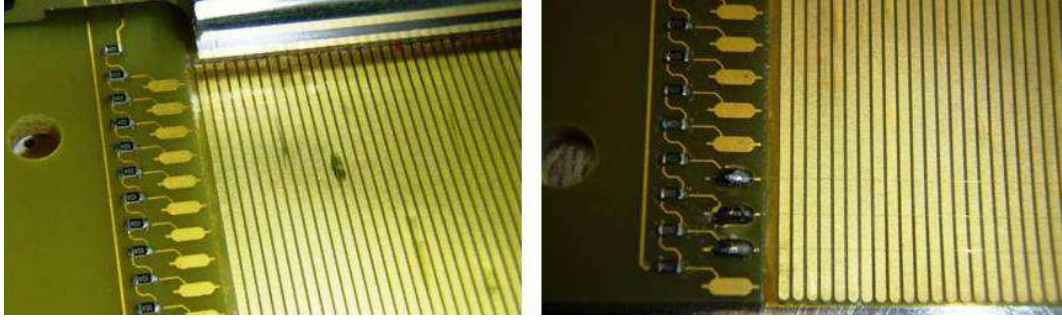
Detail of a polyimide PCBs: resistors for charge division link the wire pads where anodes are soldered.
